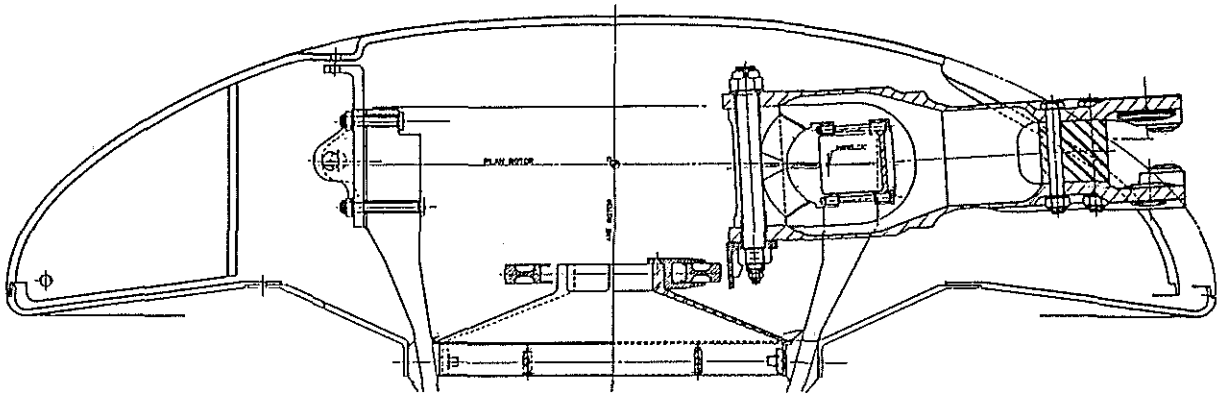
Fairing design for 5-blade Spheriflex rotor head on high-speed *Dauphin
